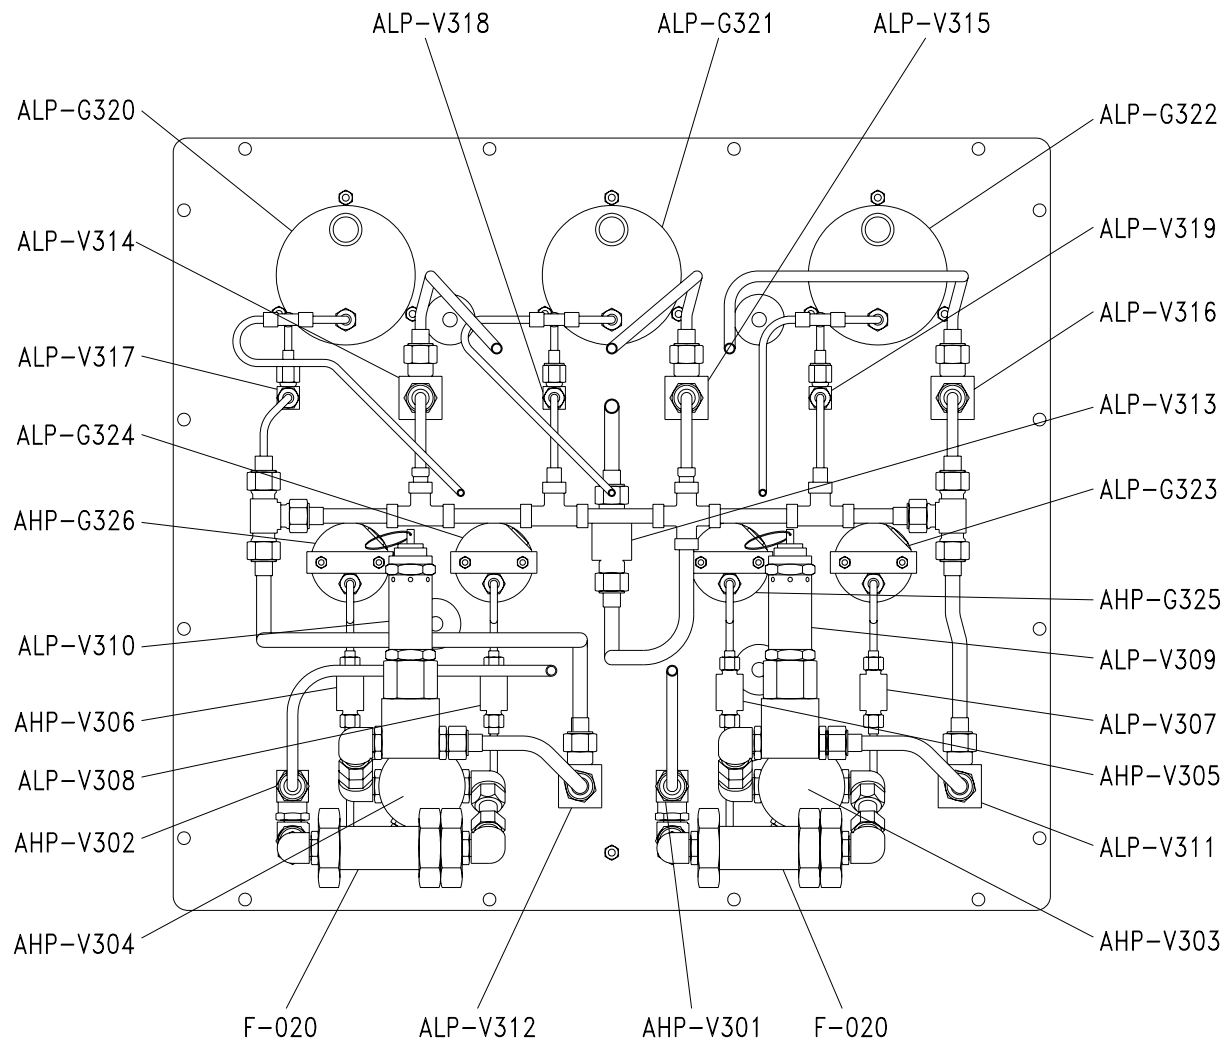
Control Console Assembly, Rear View of Front Panel Assembly
